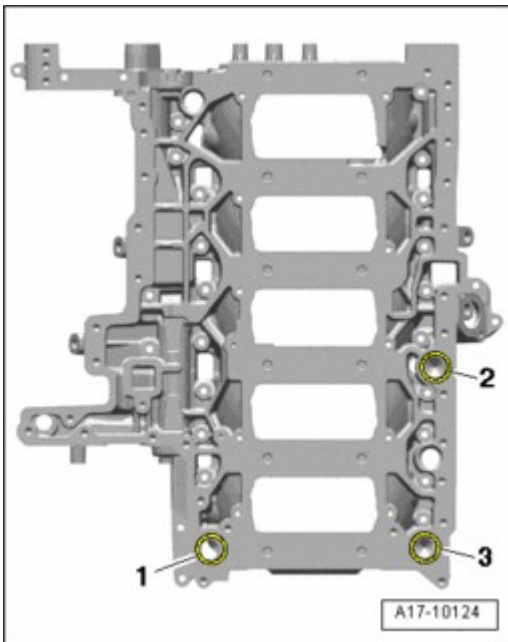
Inserting New Seals Into Grooves On Cylinder Block
